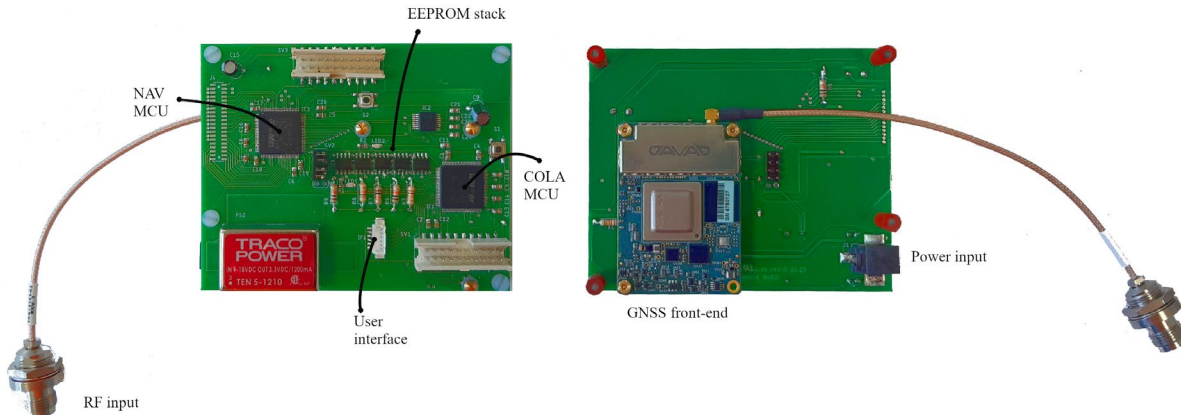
Assembly of the final ABACO board prototype (top view on the left, bottom view on the right)
